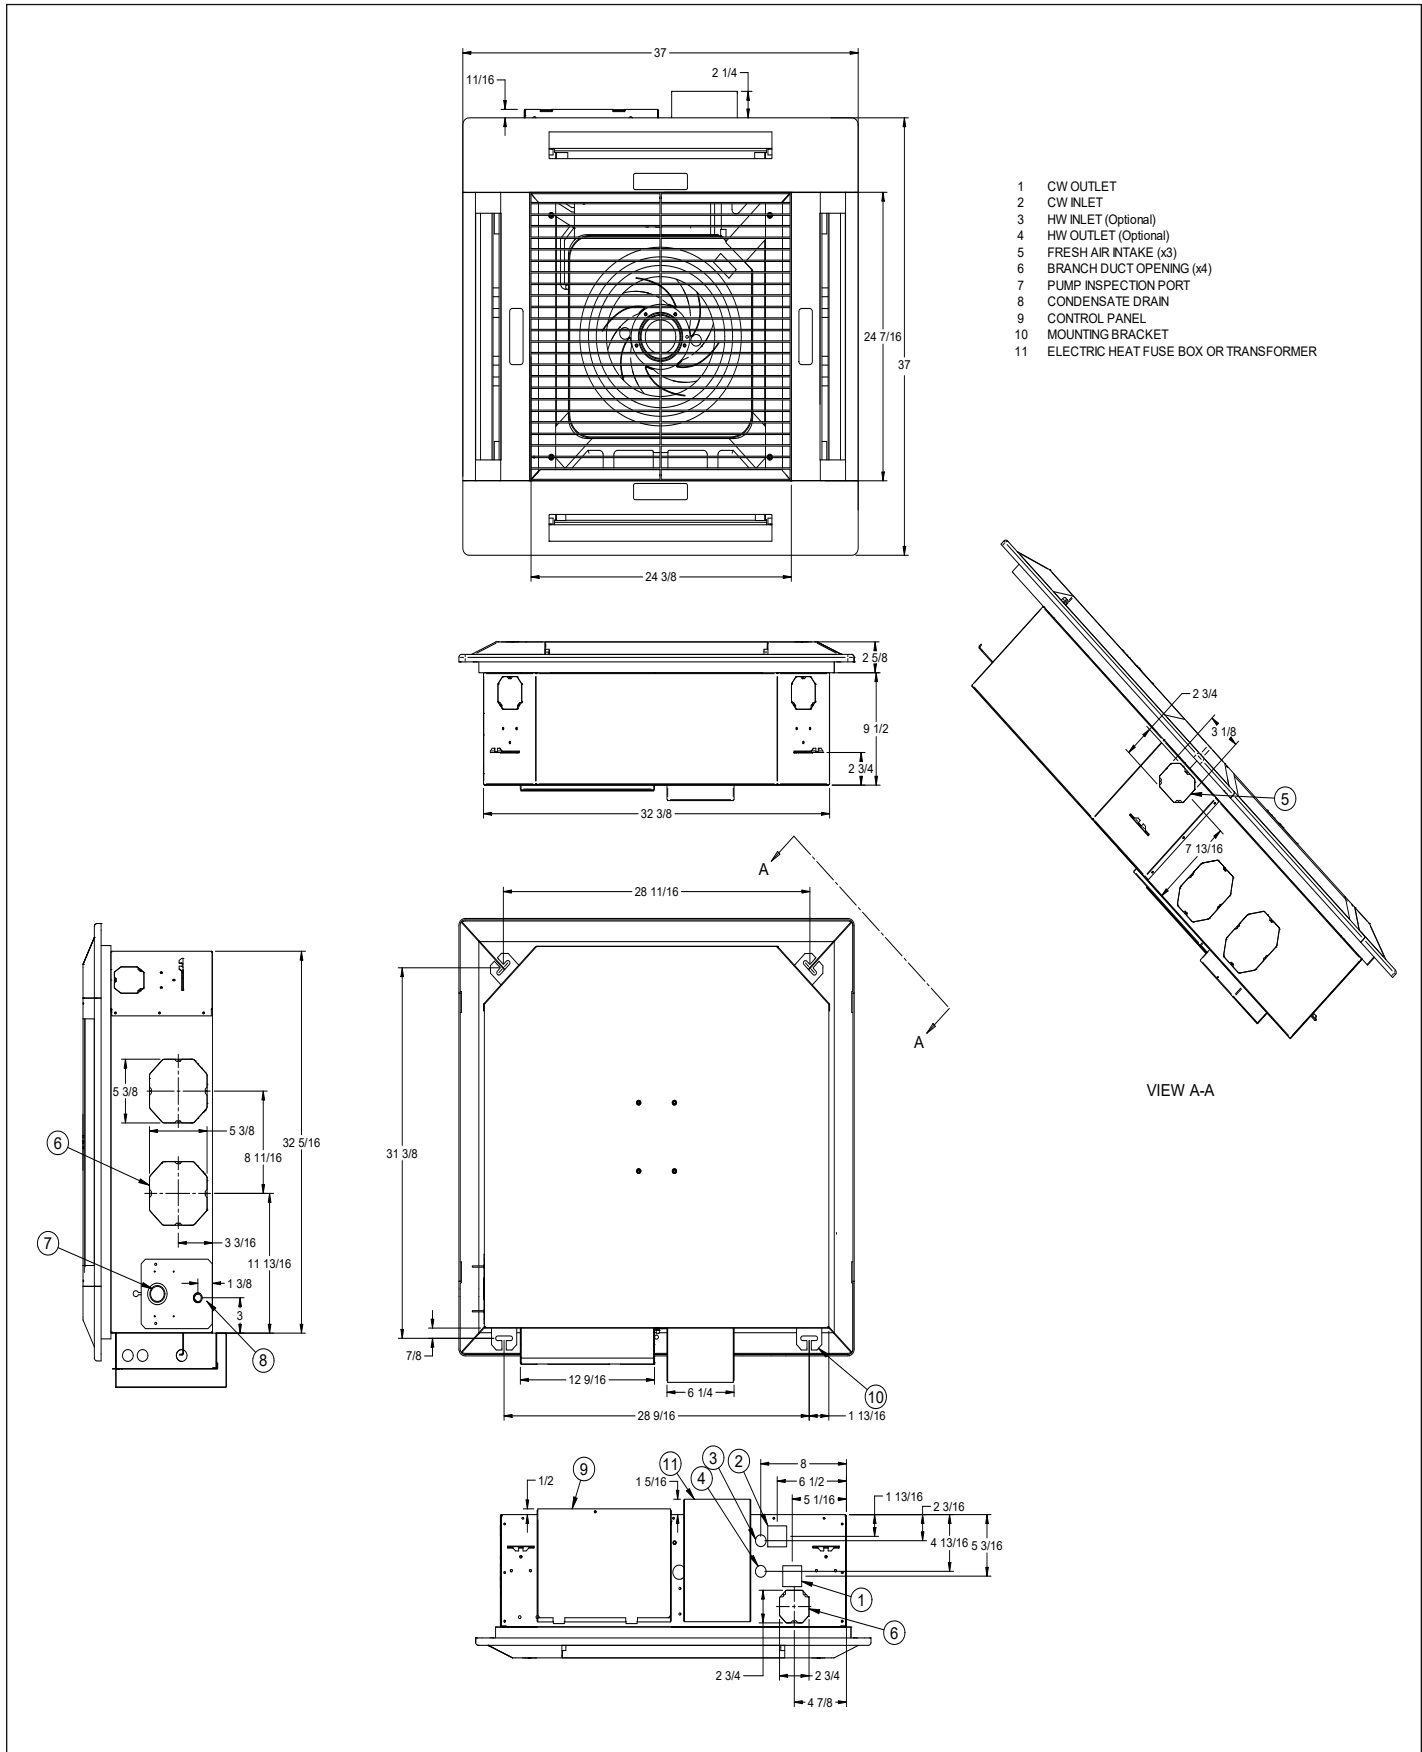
Dimensions - Large Chassis: CCW33 and CCW36 (in inches)
